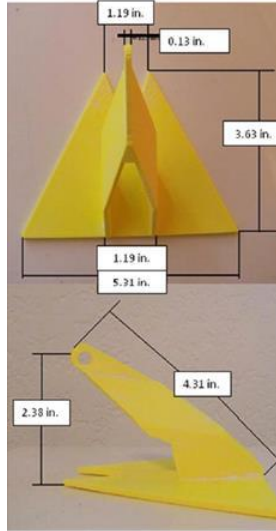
Drag embedment anchor model, DEA (adapted from Gilbert et al., 2013).
